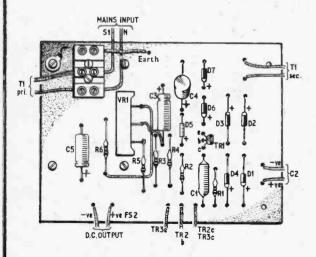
Component assembly on p.s.u. printed circuit board
